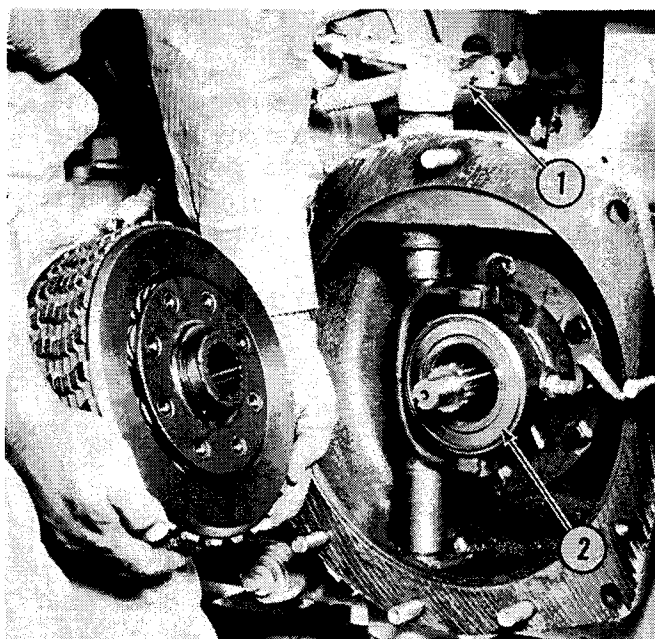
REMOVING STEERING CLUTCH ASSEMBLY
